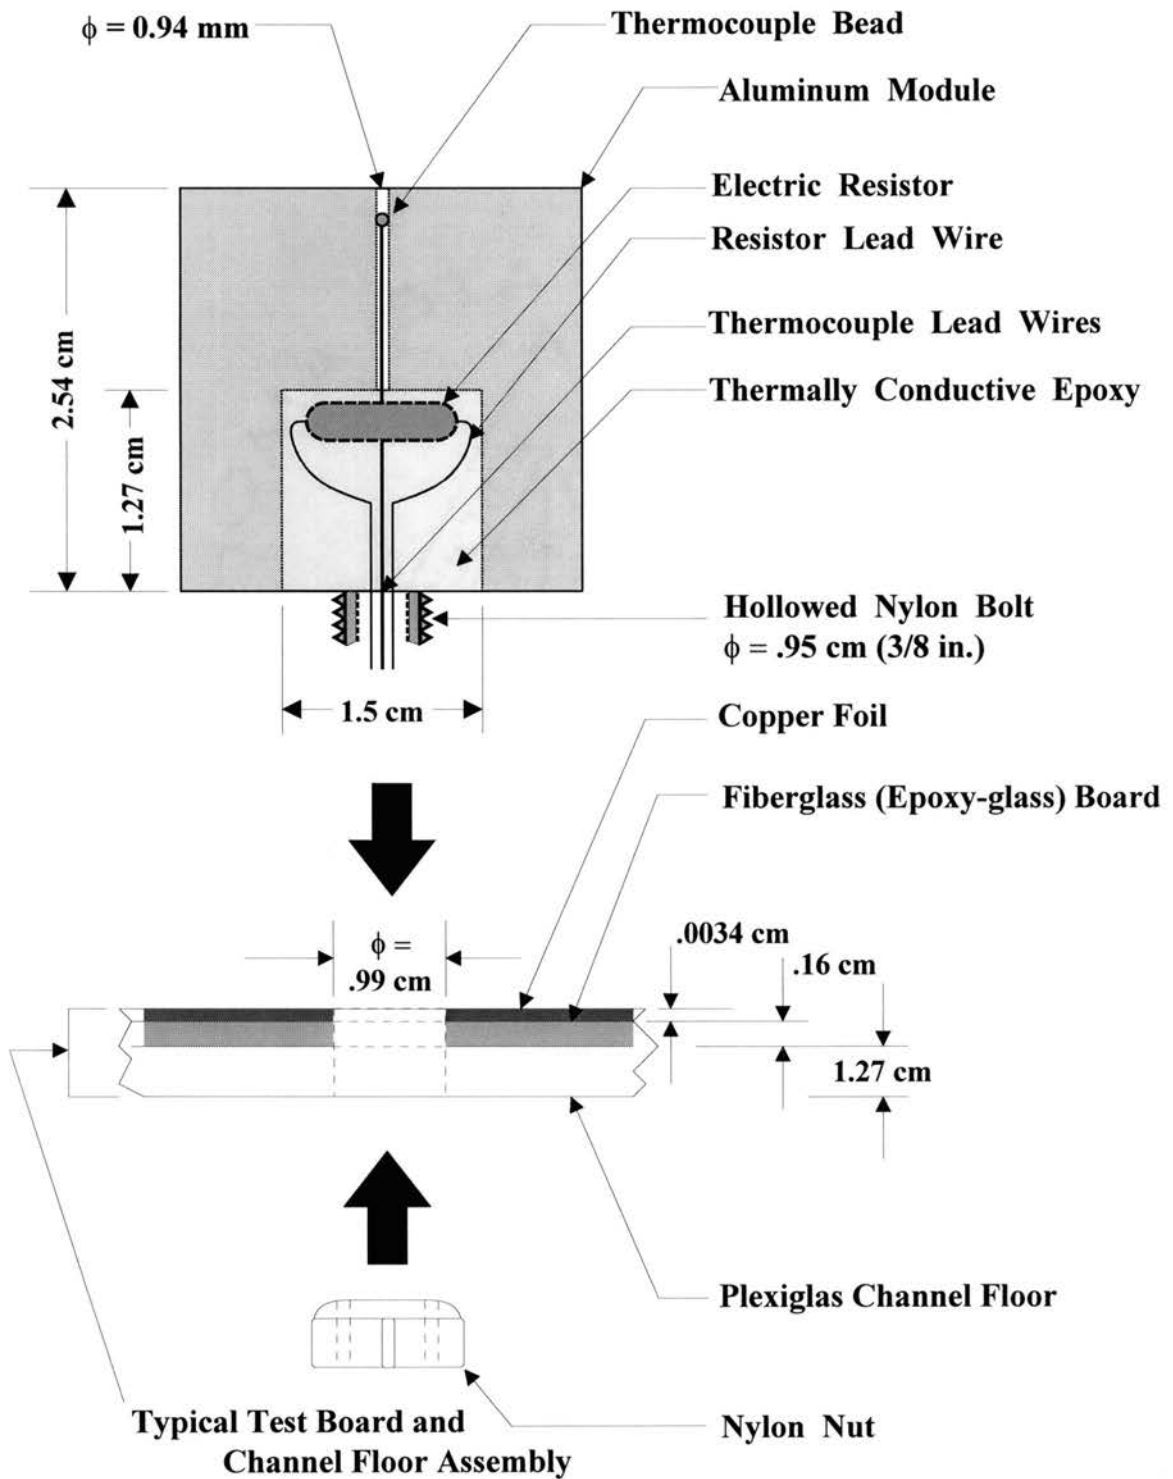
Detailed plan-view of a full-size cubic aluminum module and a typical test section channel floor assembly.
